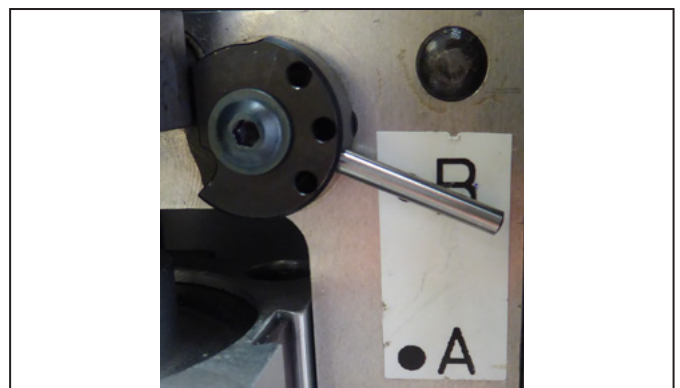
Stranded wire fixing unit configuration (set: B)
